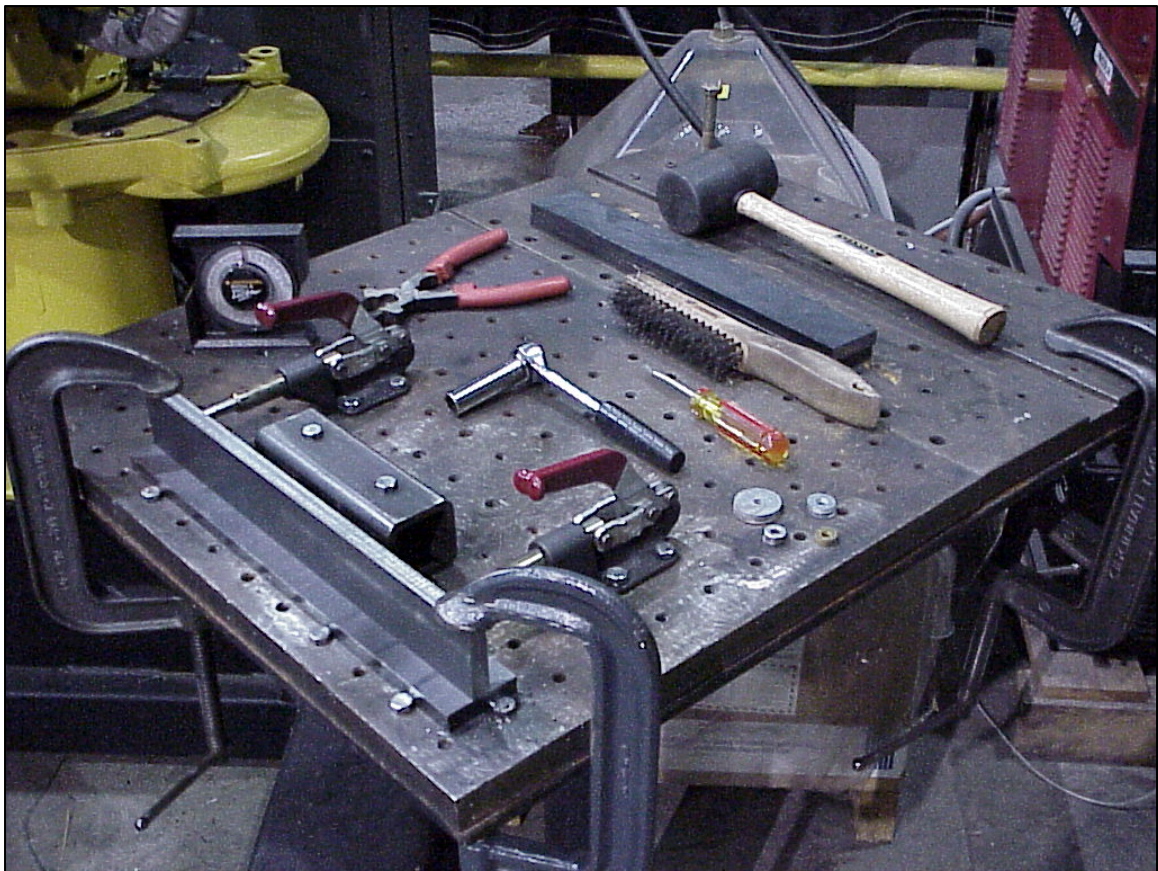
Experimental setup including clamping, fixturing, and all of the tools used.
